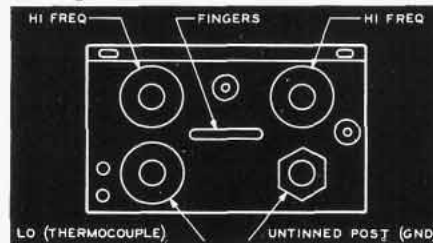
Bottom View: Binding post plate assembly — Q Meter Type 160-A.
